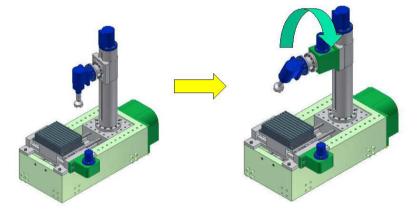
The Reconfiguration of a 3-Axis Milling Machine to a 4-Axis Milling Machine [55]
